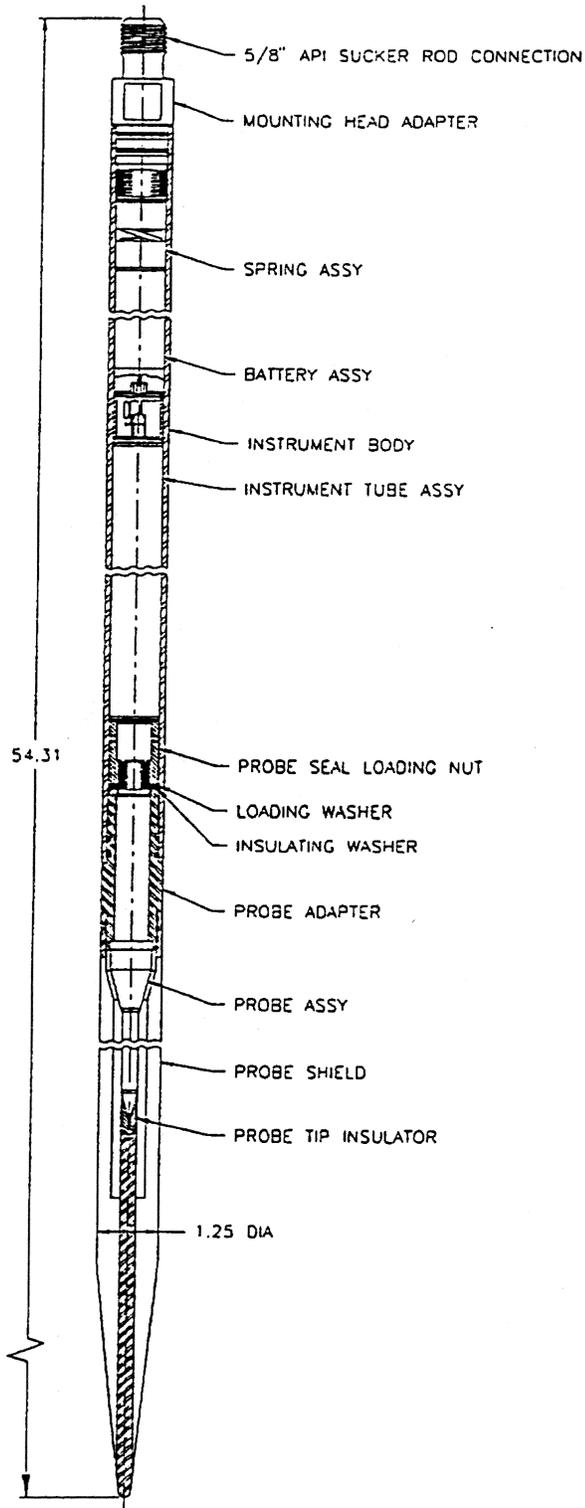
Cross-Sectional View of Fully Assembled Downhole Corrosion Monitoring System
